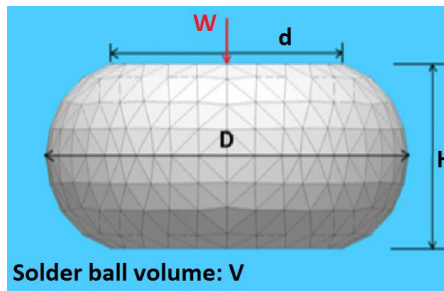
Surface Evolver can determine the maximum solder diameter D and solder ball height H based on the solder volume V , applied force W and pad diameter d .
